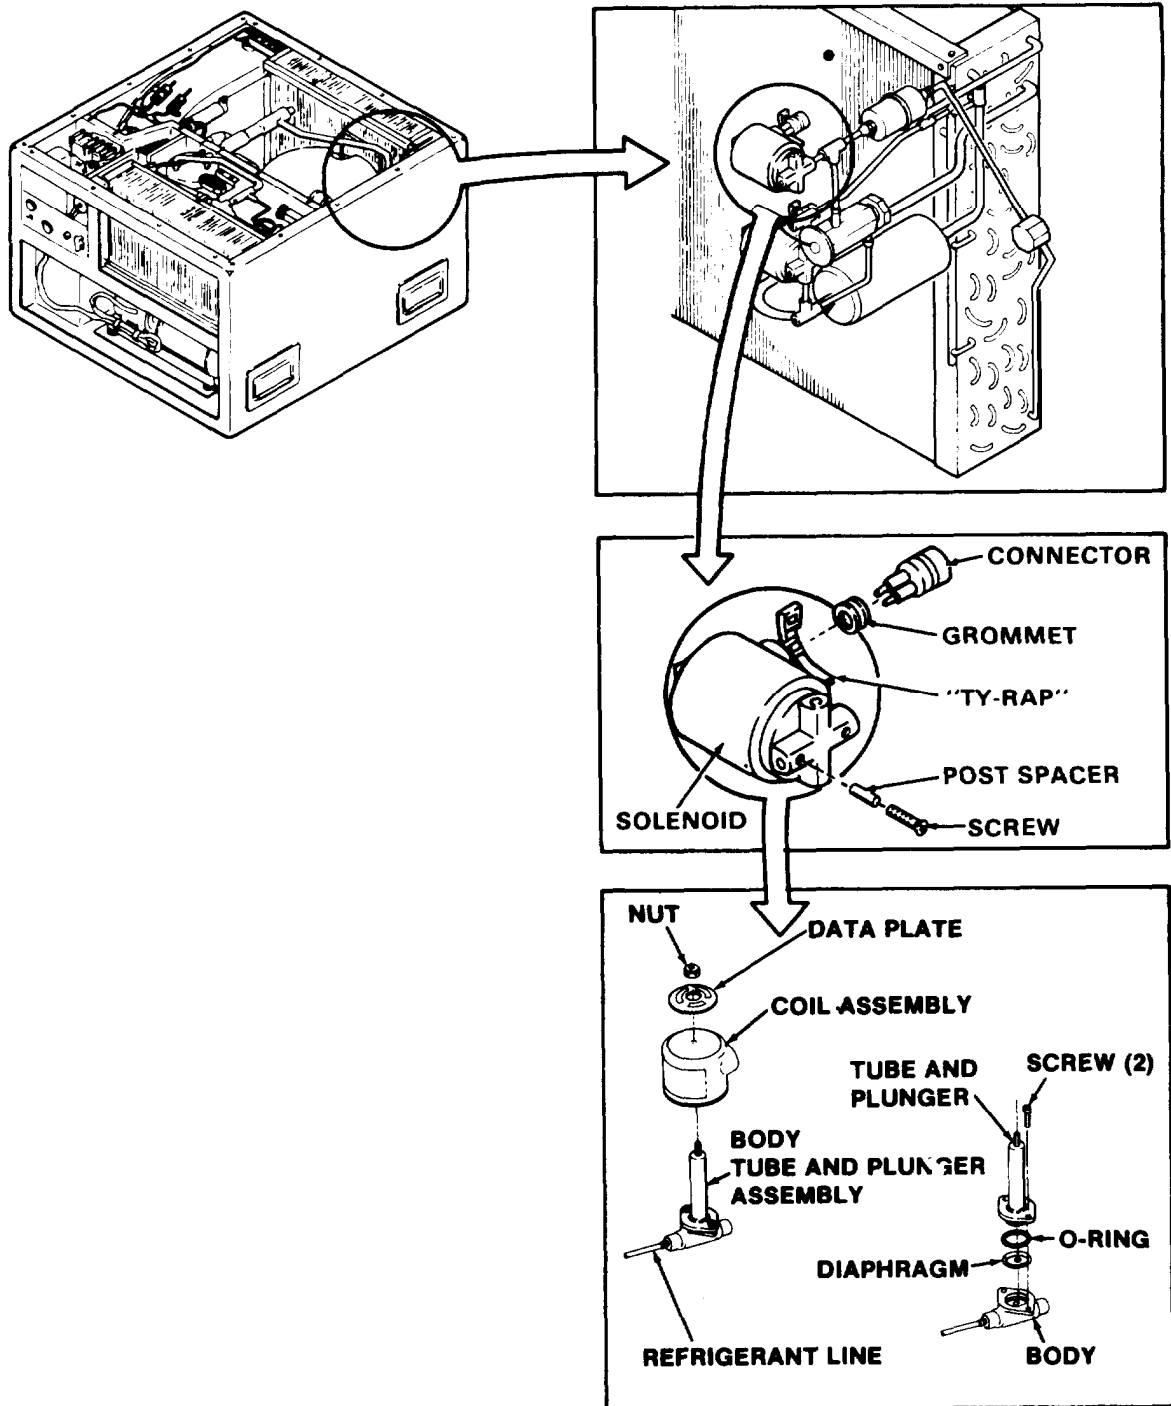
Liquid Line and Pressure Equalizing solenoid valves
